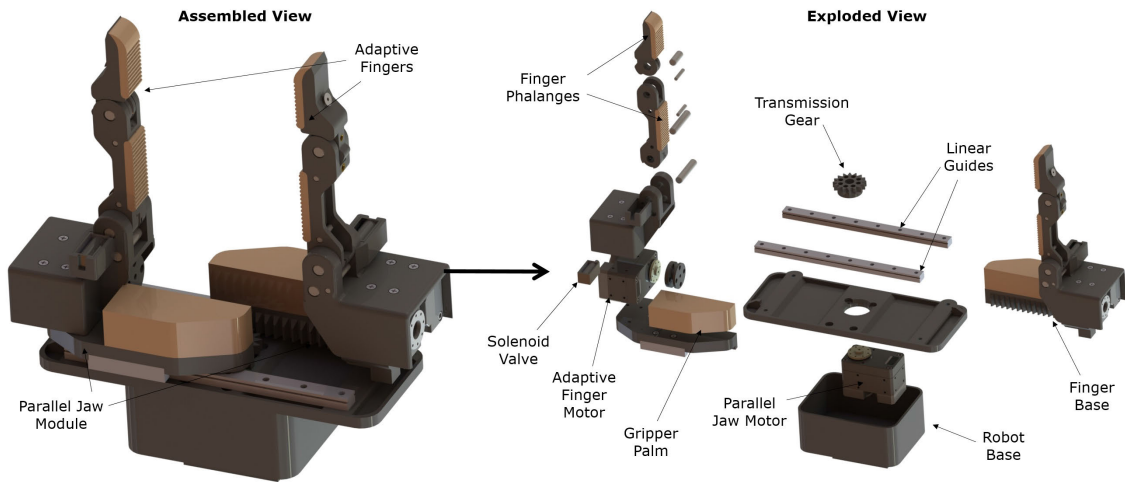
The assembled and exploded views of the proposed multi-modal robotic gripper.
